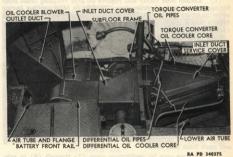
Oil Cooler, Blower, and Oil Pipe Connections—M18
